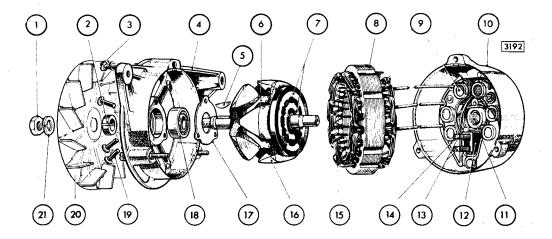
Exploded view of the Lucas 11 AC Alternator.
